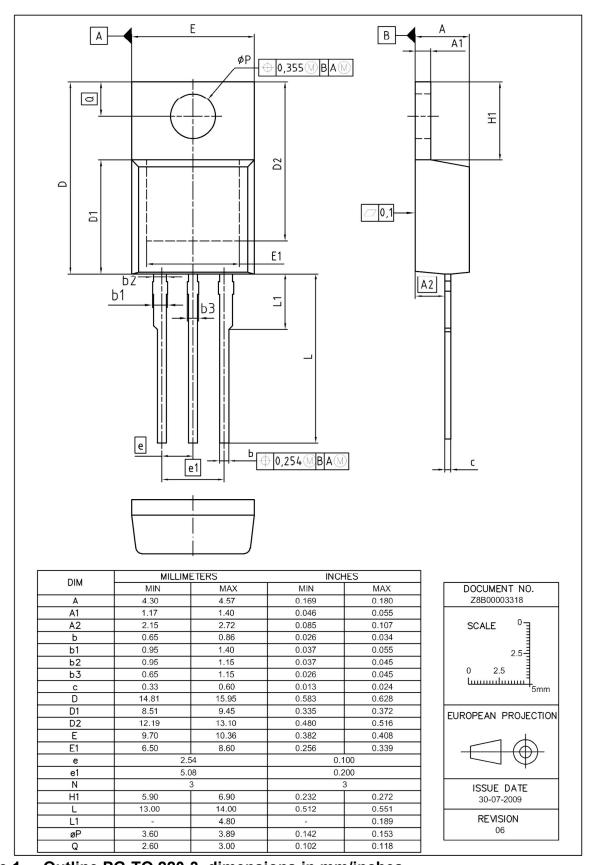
Outline PG-TO 220-3, dimensions in mm/inches
